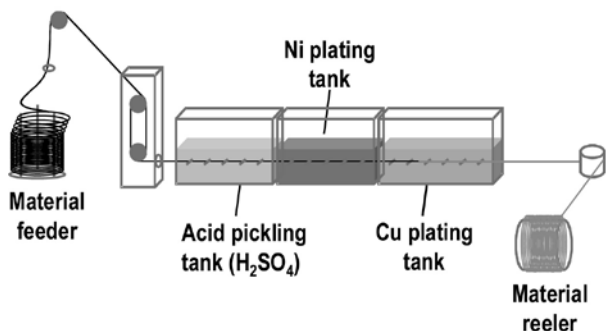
Schematic illustration of welding wire manufacturing PSL line.
